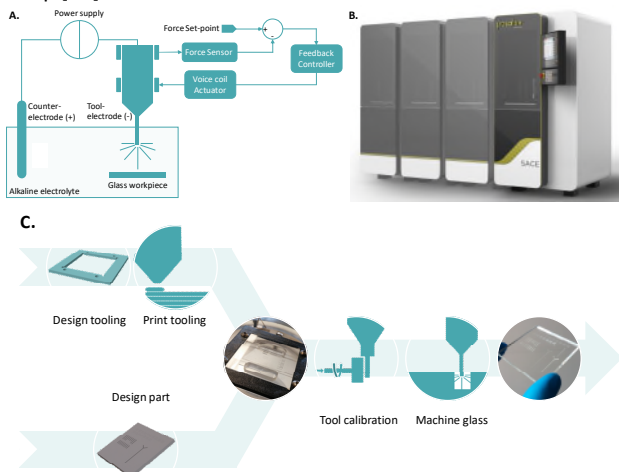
A. SACE process principle B. Developed industrial SACE machine [10]. C. Process steps for fabrication of a client-specific workpiece in glass by SACE technology.
